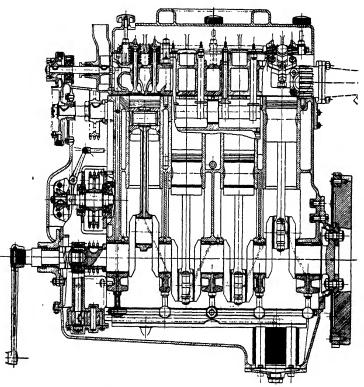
SECTIONAL VIEW OF FOUR-CYLINDER PERKINS ENGINE
